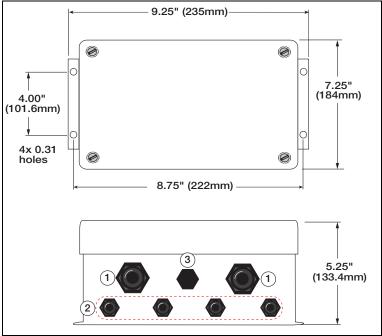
JB4EP and JB4SP Enclosure Dimensions
